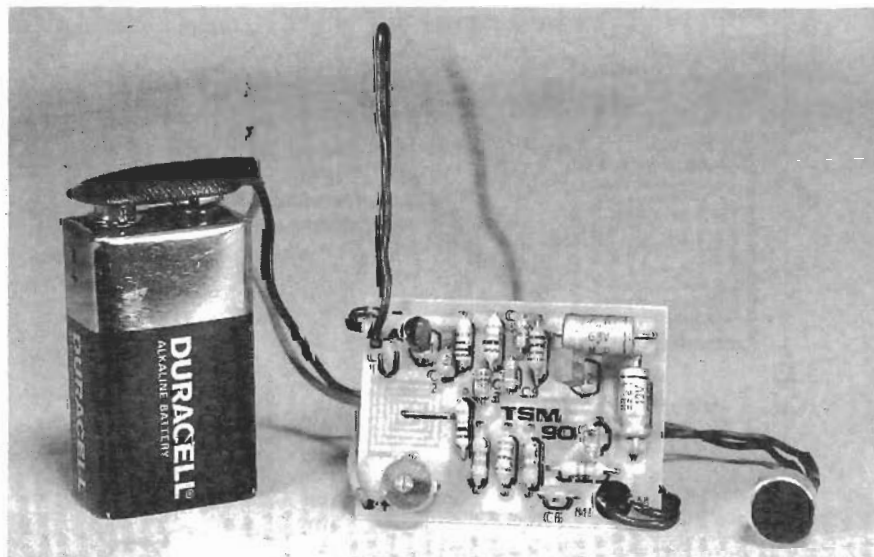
THE FULLY ASSEMBLED PC BOARD. This FM transmitter board is so small, measuring $1\frac{1}{16} \times 1\frac{1}{16}$ inches, that it will fit inside almost anything.
